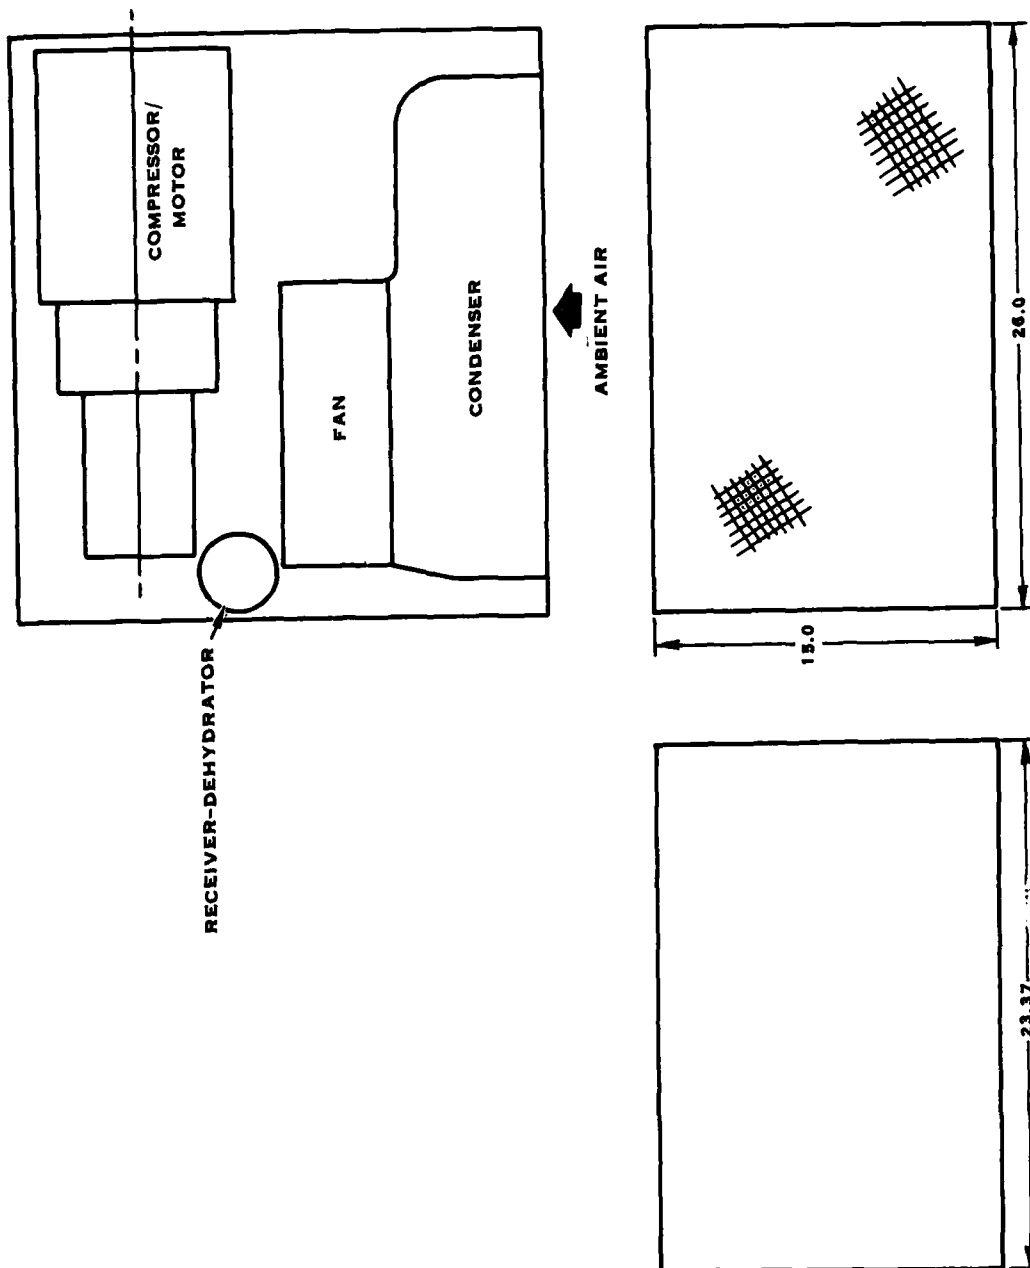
COMPRESSOR/CONDENSER MODULE
